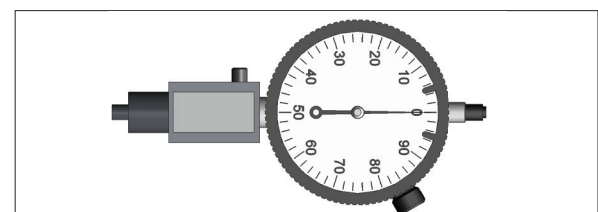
Figure F. Inspection Depth Gauge, Part # 910 121 179.
